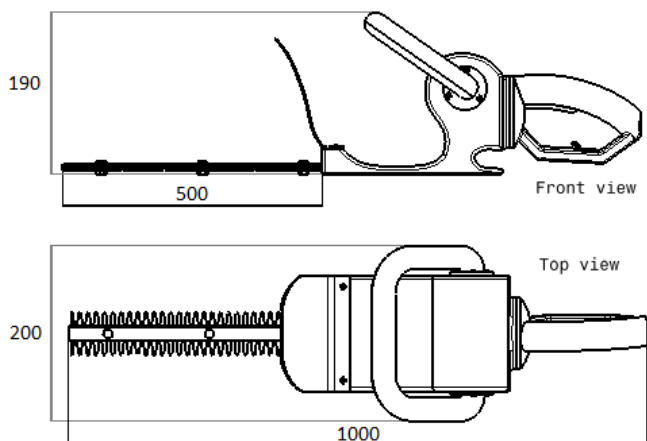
Drawing of electric hedge trimmer (all dimensions in mm)
